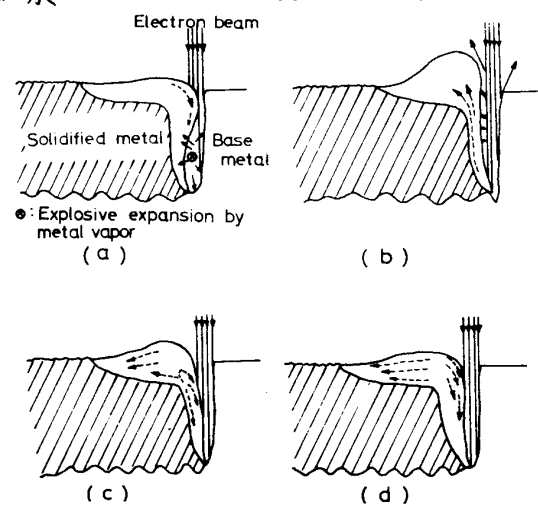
Schematic representation of dynamic behavior of weld molten metal
